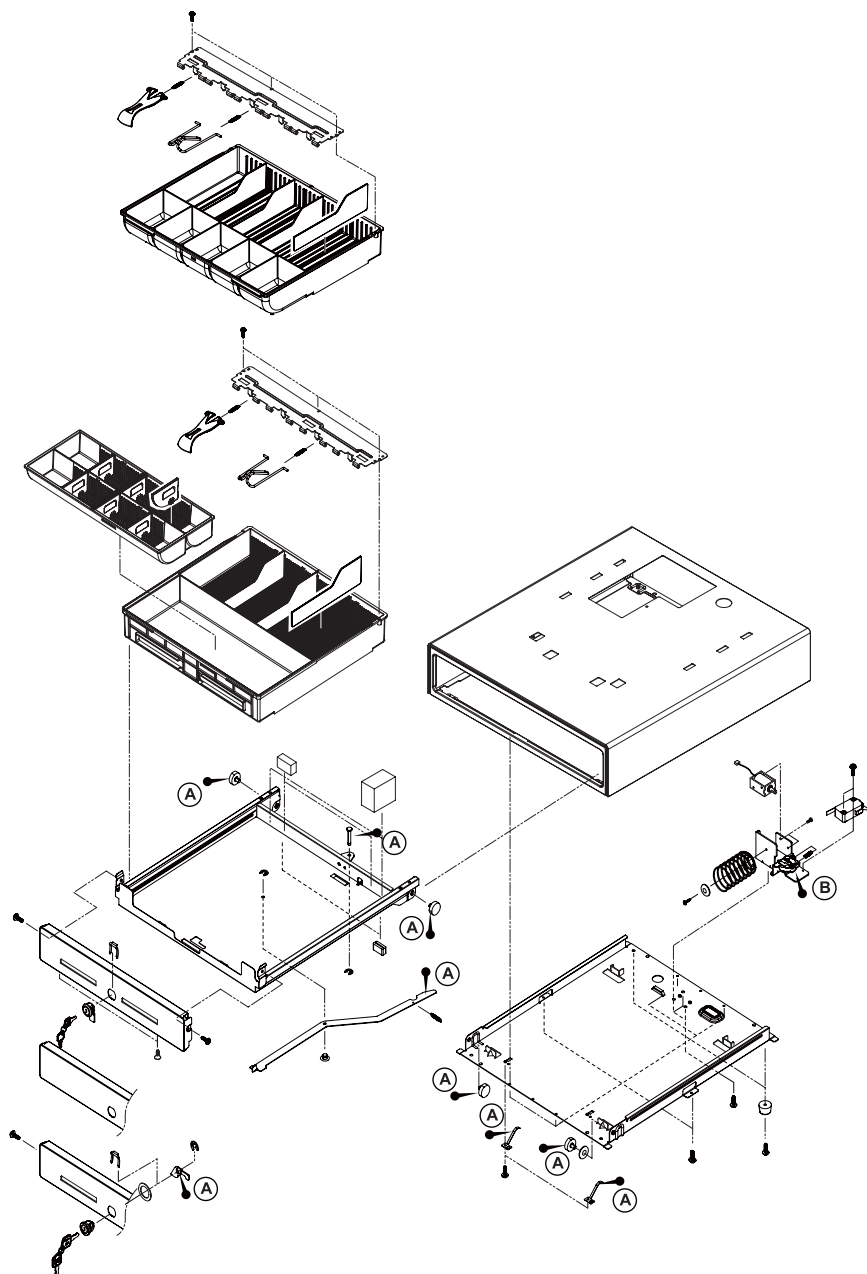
Lubrication Points of the G-TYPE Drawer
